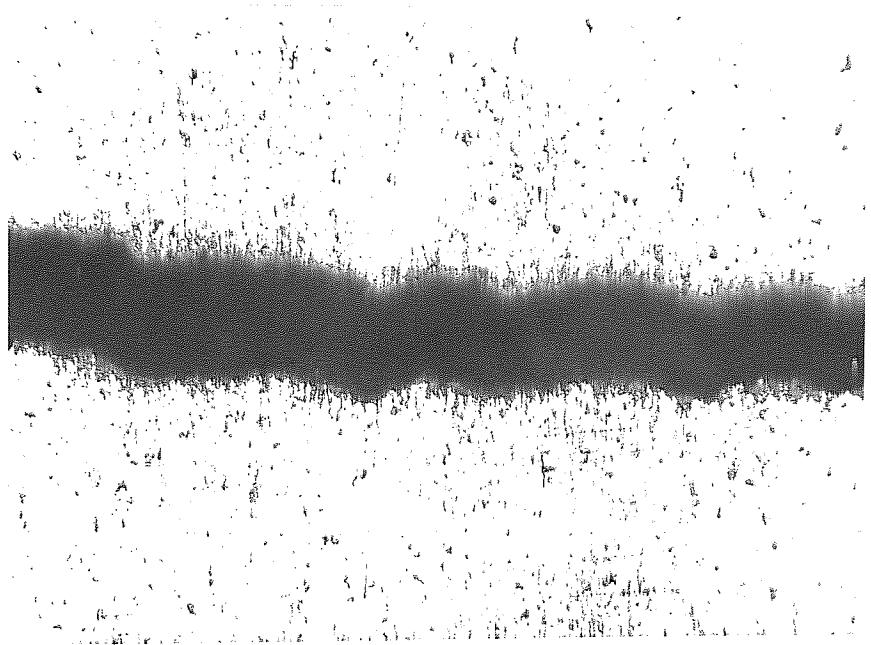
Crack Path through the Weld Metal. Tested at Room Temperature in the As-Welded Condition. Magnification x200.
